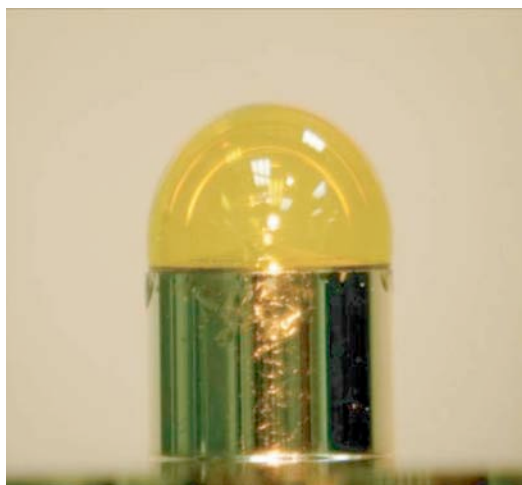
This is a partial assembly showing the outer and inner hemispheres and the careful alignment. This alignment is required to produce a uniform hydrogen layer during the experiment.
